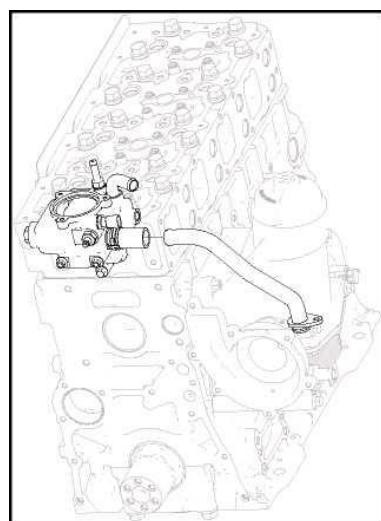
Drawing for analysis of the small recirculation water return hose and the rubber hose connecting the coolant
